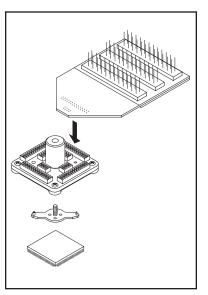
Agilent Wedge Probe Adapters for QFP Package
